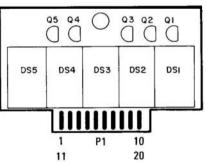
DIGITAL PANEL METER ASSEMBLY AI, COMPONENT LOCATIONS
